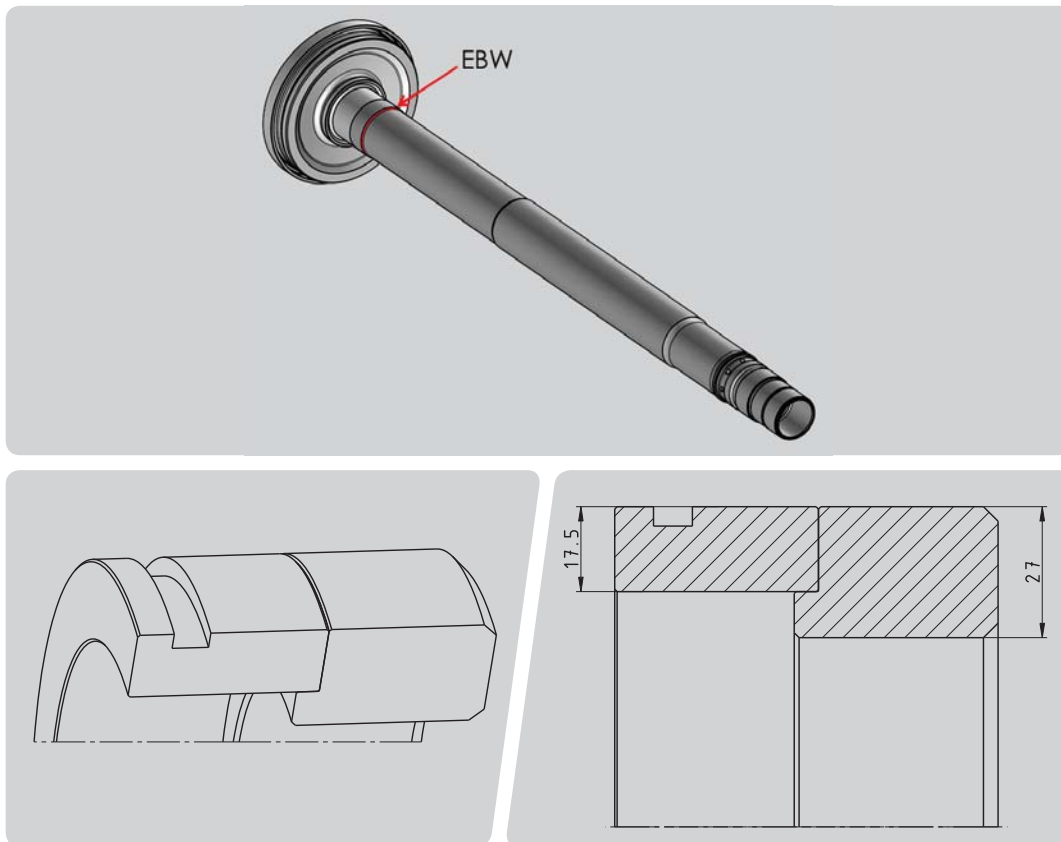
Schematic representation of the MGT-30 gas turbine LPT shaft (top), outline and detail drawings of the butt-square weld joint design (bottom)
